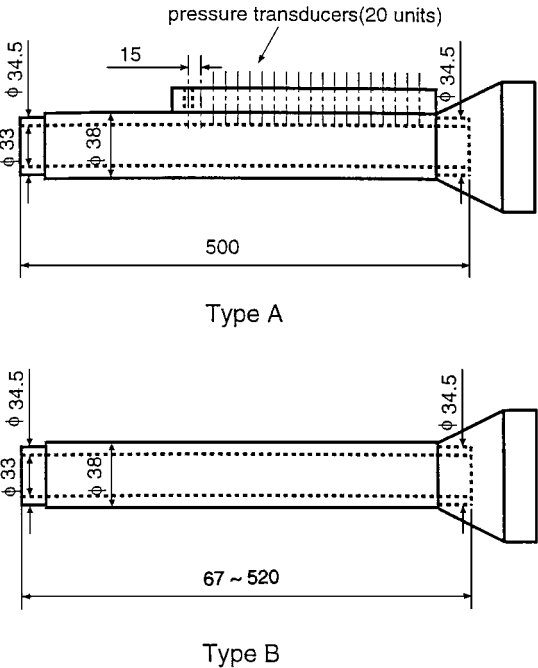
Combustor model geometries (dimensions in millimeters): type A is for pressure measurement, type B is for skin-friction force measurement.
